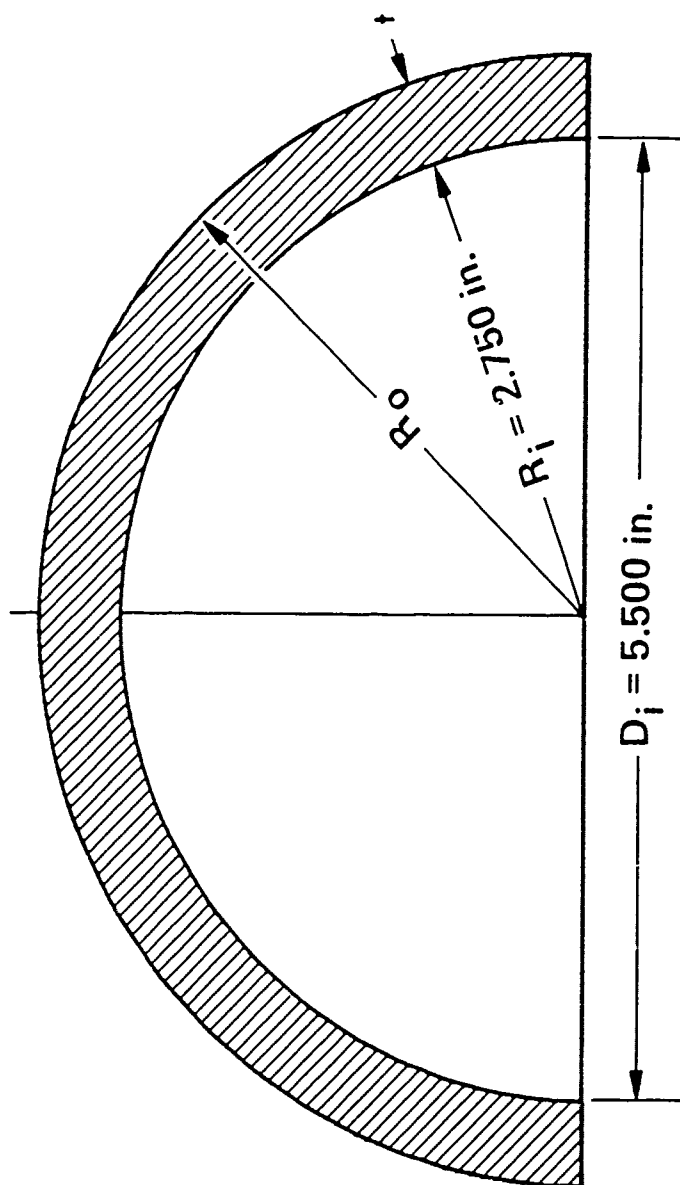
Dimensions of Shell Specimens of Constant Thickness Without Flanges.
